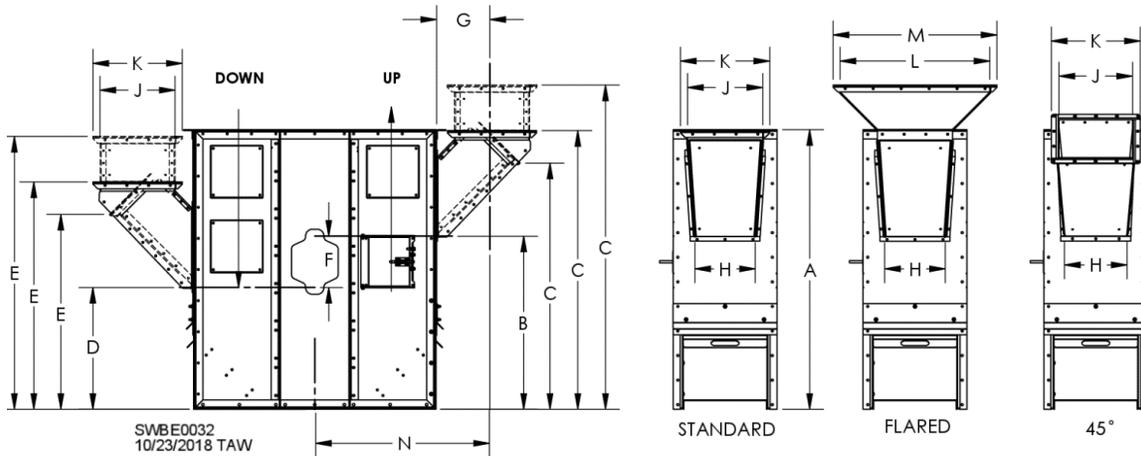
& Tables 3A & 3B – Bucket elevator inlet dimensions (in inches)
